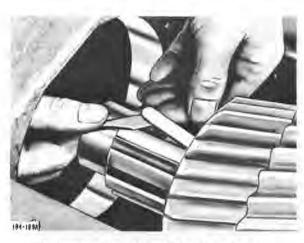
Removing Fourth or Fifth-Speed Gear Key
